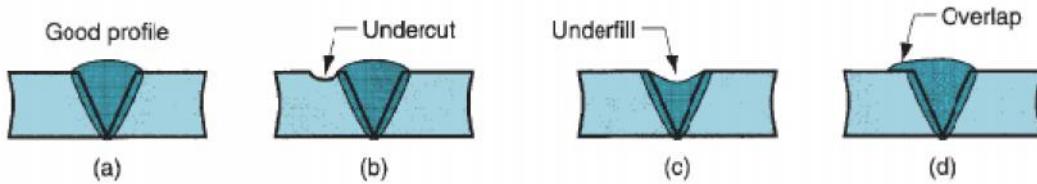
(a) Desired weld profile for single V-groove weld joint. Same joint but with several weld defects: (b) undercut, in which a portion of the base metal part is melted away; (c) underfill, a depression in the weld below the level of the adjacent base metal surface; and (d) overlap, in which the weld metals pills beyond the joint on to the surface of the base part but no fusion occurs.
